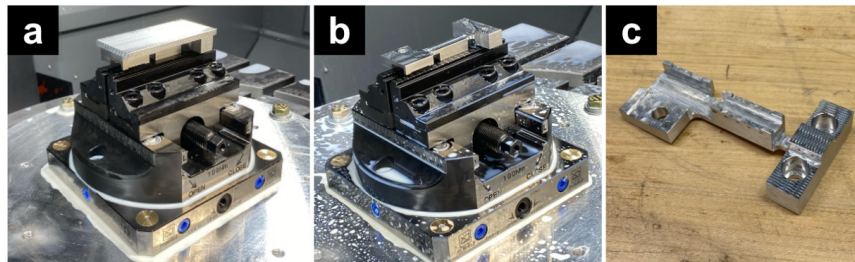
Armature machining showing (a) second setup before machining in first setup and (b) after machining with (c) the resulting armature.
